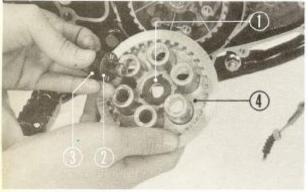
① 12.5 mm thrust washer ② Thrust needle bearing
